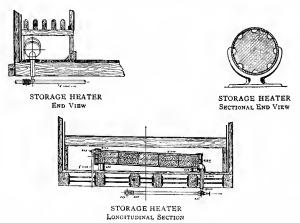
Gold's Improved Storage Heater for Use in Refrigerator Cars During Cold Weather. Gold Car Heating & Lighting Company.
